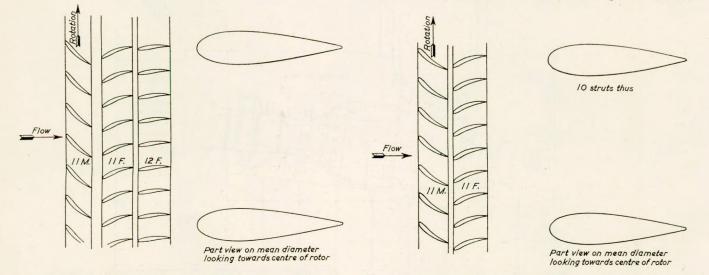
Expanded plan view showing details of G2 compressor blading at outlet end—before modification
